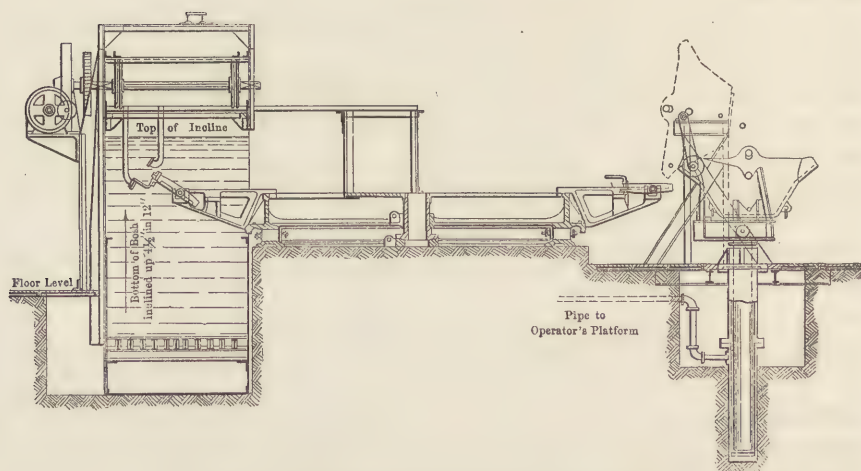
CASTING MACHINE FOR CONVERTER COPPER.
